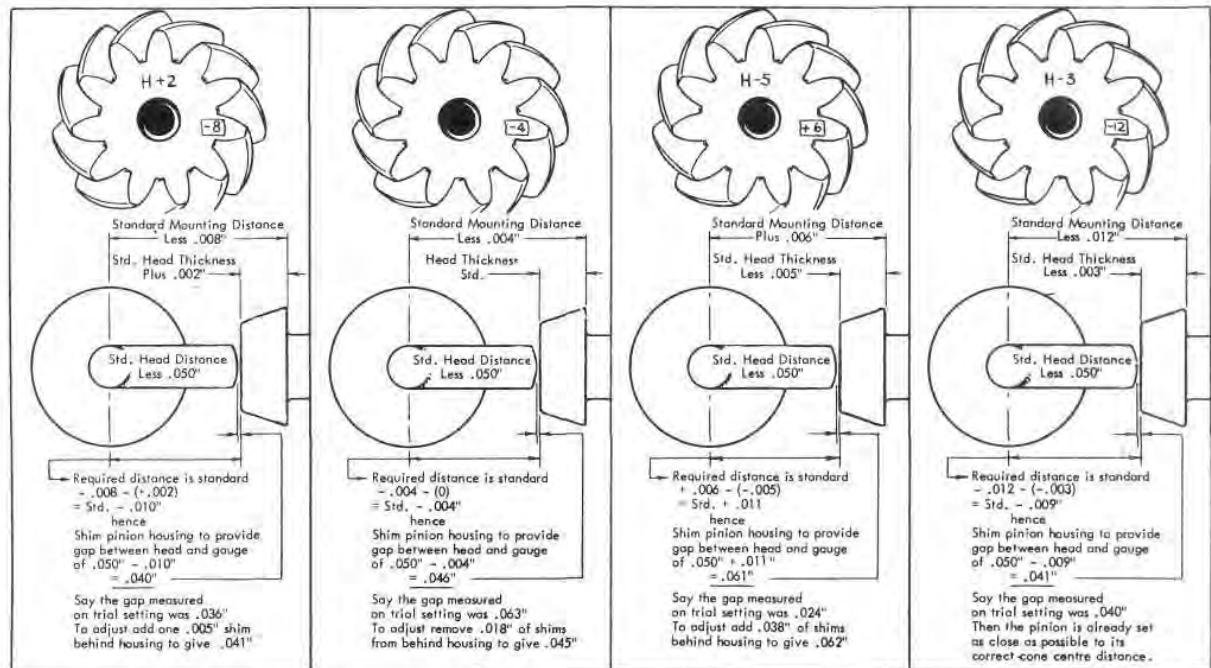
Calculation of Pinion Head Housing Shim Thickness
